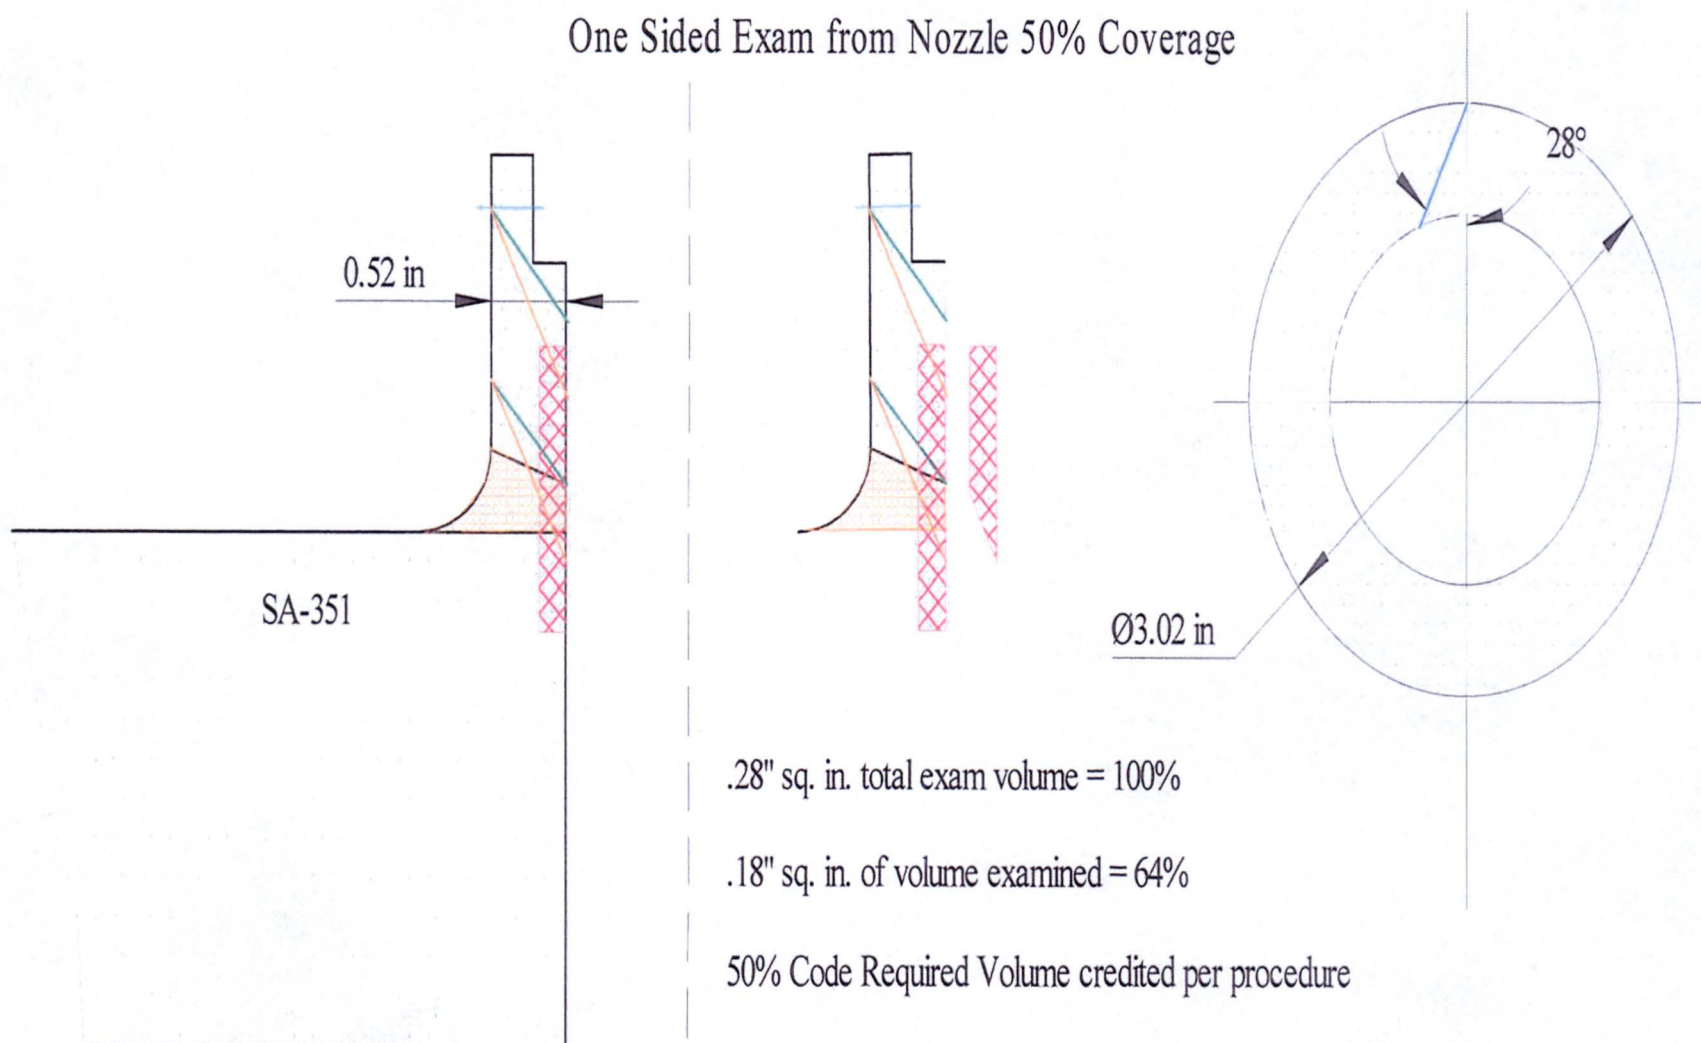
Weld 2-RC-17-09N (Extracted from Reference DRAWING 2A-9)
